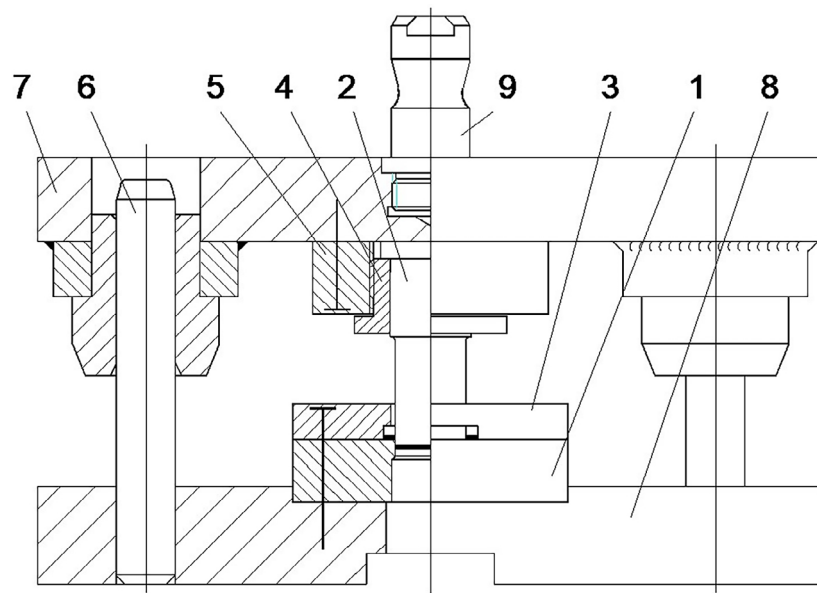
The blanking die, where: 1 – die, 2 – punch, 3 – sweep-off gear, 4 – clamp nut of the punch, 5 – holder of the punch, 6 – leader pin, 7 – upper plate, 8 – lower plate, 9 – die shank
